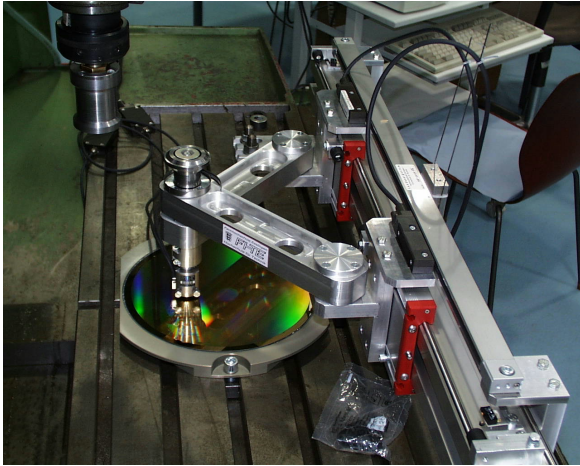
Prototype of the parallel 2DOF inspection system in the FHTE machine tool laboratory-arranged above the Lattice Grid Plate[2]
